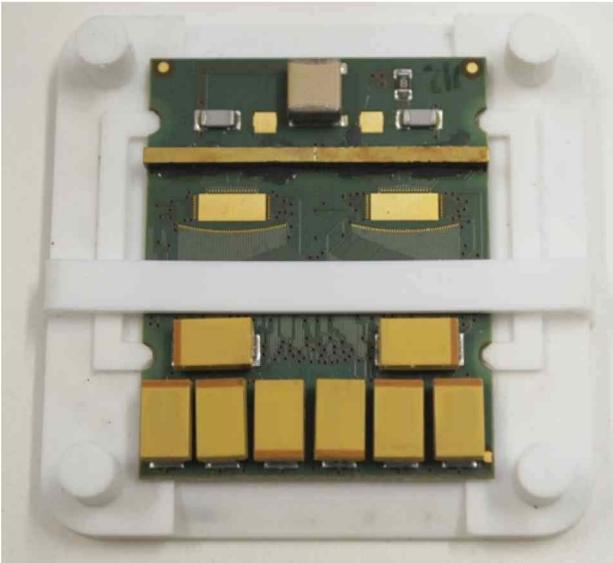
32 pixels array detector bonded on PCB with housing for ASICs.
